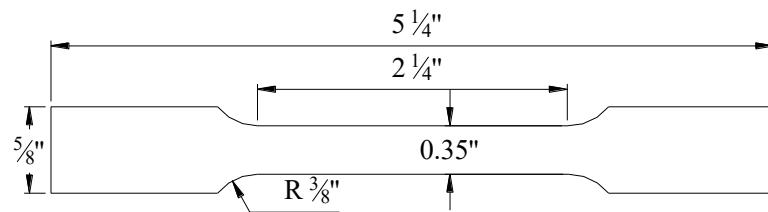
Fully threaded rod coupon dimension (units: inches)
